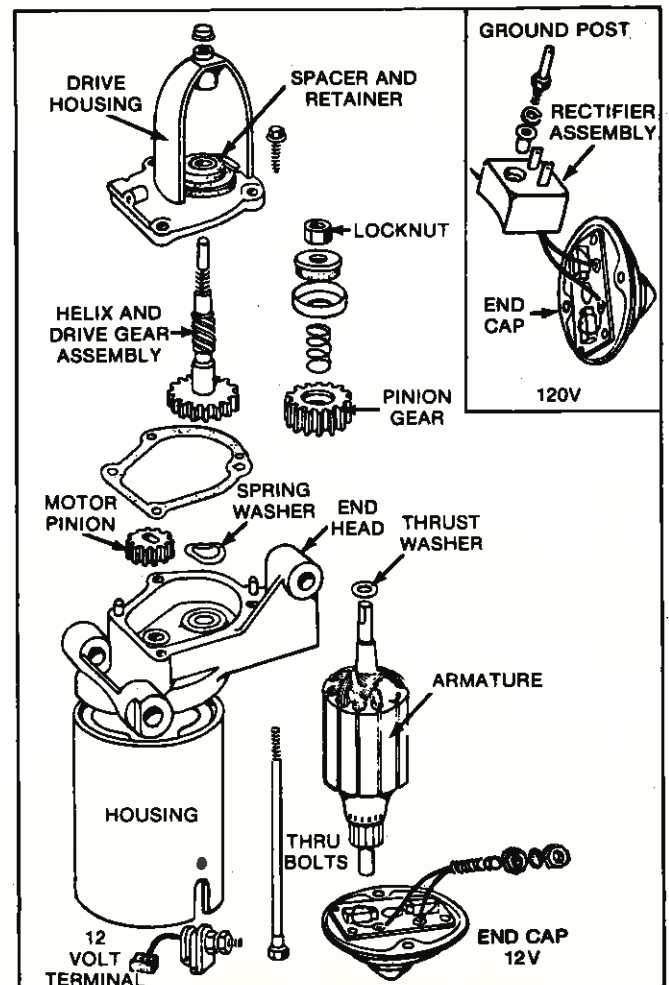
12V & 120V Starter Motor, Exploded View
